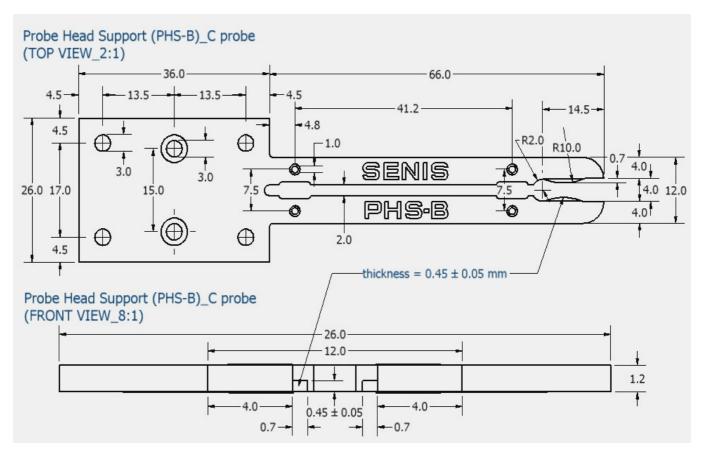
Dimensions of the PHS-B probe head support (Top & Front view). All dimensions are expressed in millimeters. For tolerances assume ± 0.1mm.
